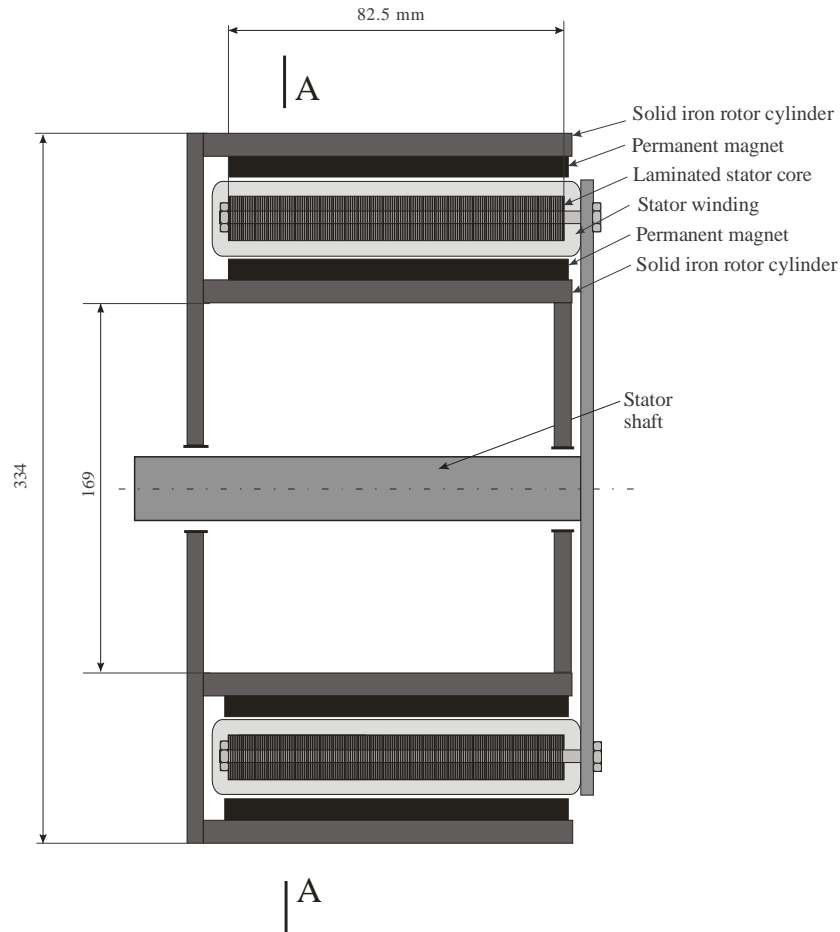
Topology of a twin-rotor cylindrical motor with slot-less stator
